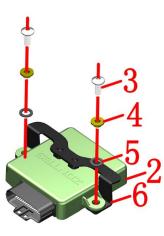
REAR COVER COMPONENT		PKE component	CHK	40)
